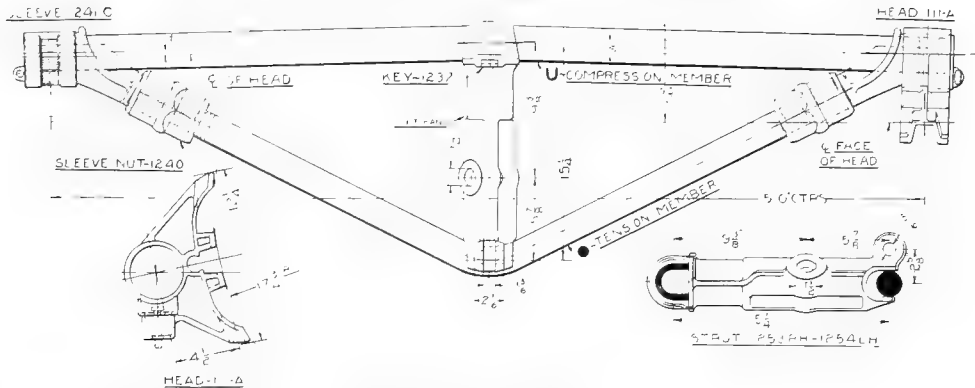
P C Creco Brake Beam for Heavy Service with Four-Wheel Trucks.
